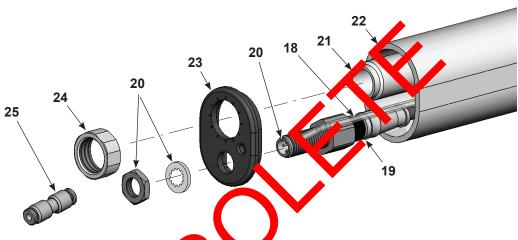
Tube-Mount Spray Gun Disassemb 1 of 5
